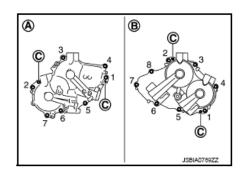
Valve Timing Control Cover Mounting Bolts Loosening Order Courtesy of NISSAN MOTOR CO., U.S.A.
